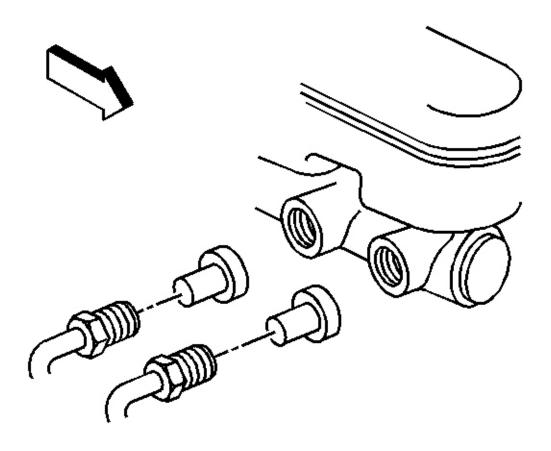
Removing/Installing Rubber Caps Courtesy of GENERAL MOTORS CORP.
